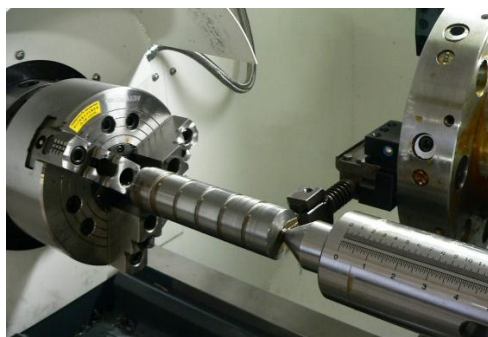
Burnishing process on OPTIMUM OPTIturn CNC machine
